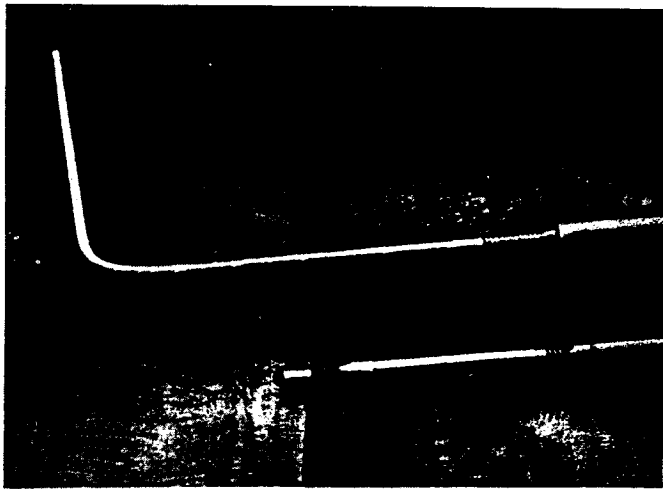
Cut the rod and bend it as shown to make a handle so you can screw it into the Gold-N-Rod.
